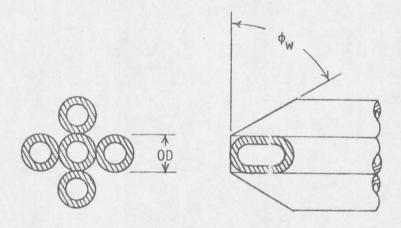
Tip geometry of a five-tube, three dimensional yaw probe
